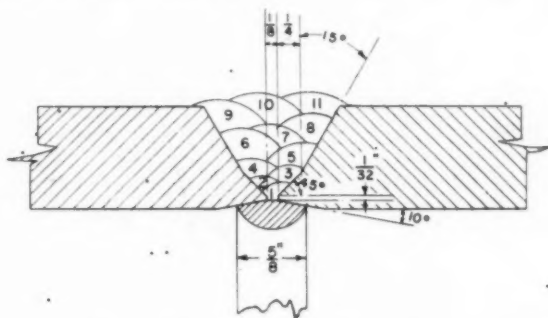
DETAILS OF V-TYPE WELDED JOINT
